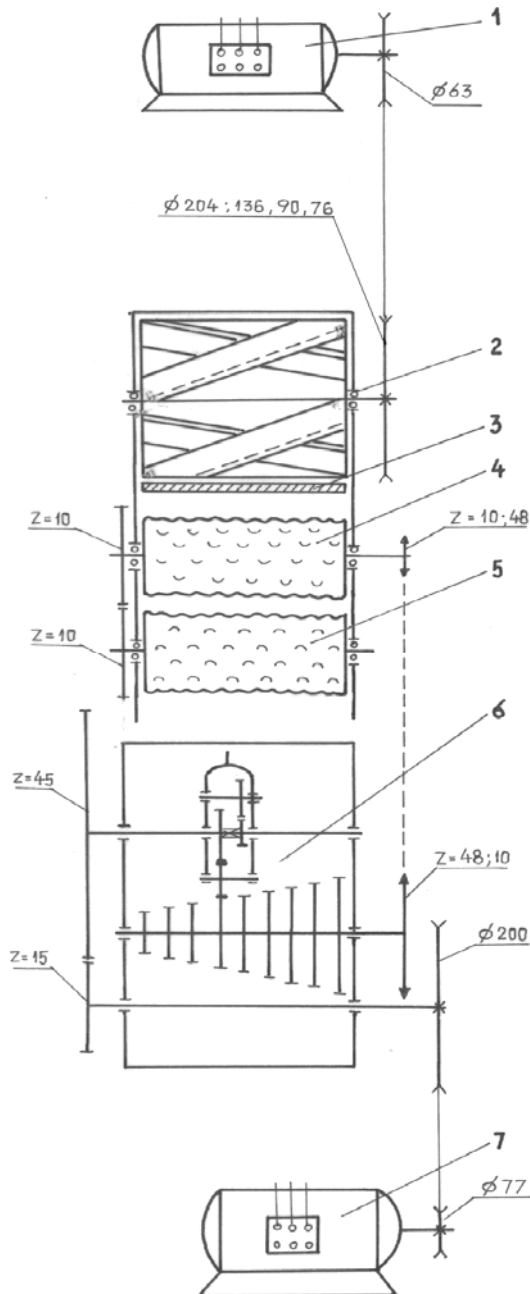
Cinematic scheme of the mincing machine for fodders: 1. – electric engine; 2. – mincing tambour; 3. – counter knife; 4. – upper supplying mixing mill; 5. – bottom supplying mixing mill; 6. – Northon gear box; 7. – electric engine of gear box
